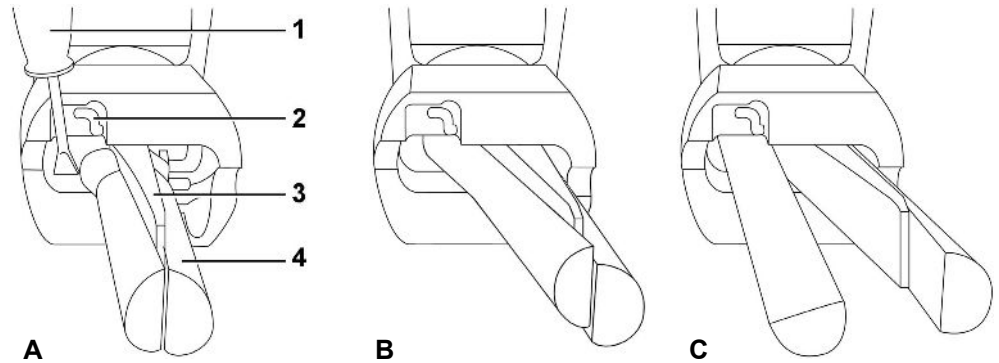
1 Assembly of the splitting wedge / pressure pieces
